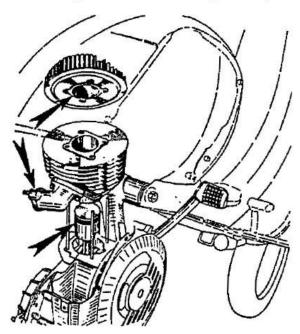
Cleaning the cylinder head, cylinder and piston
